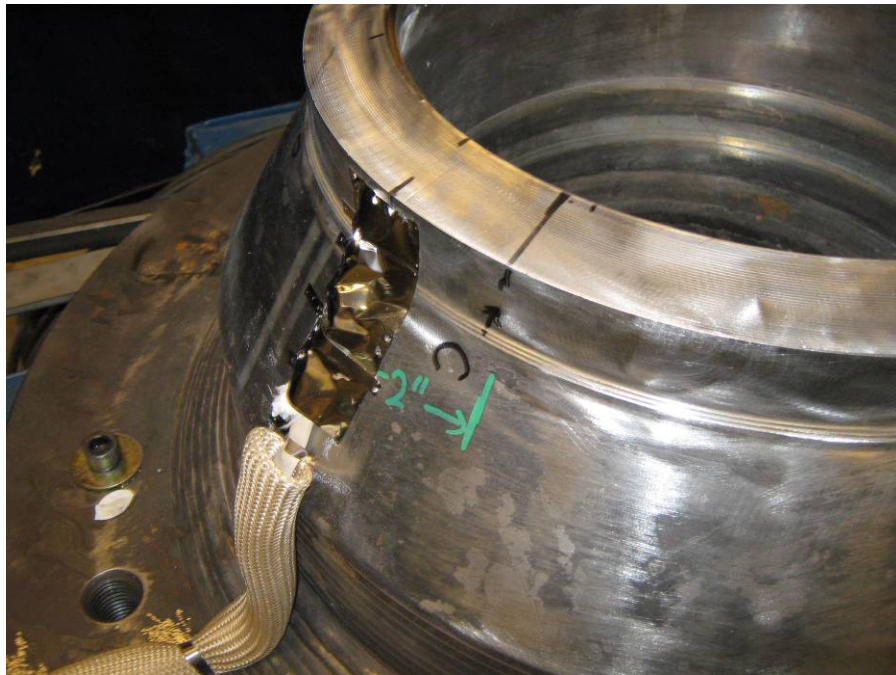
Thermocouple Locations on the OD of WOM Safe End Weld
